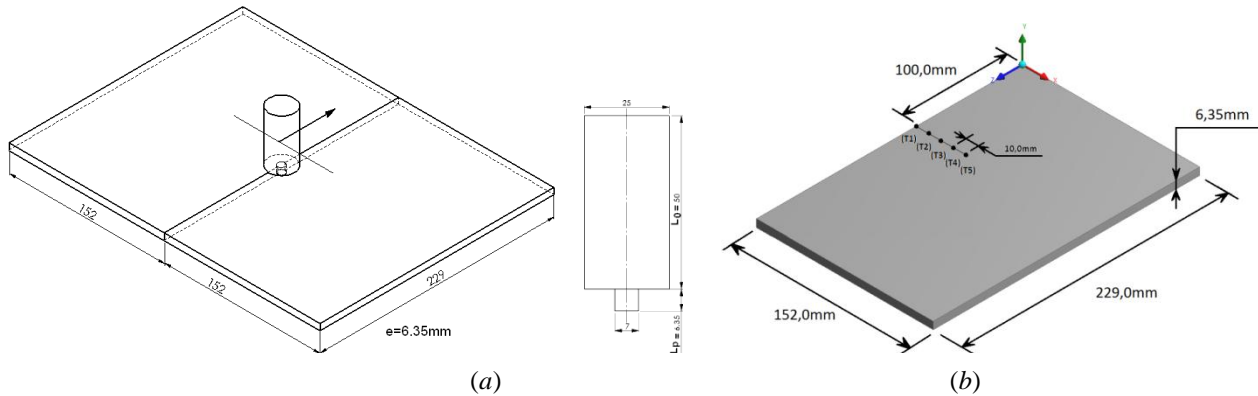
(a) Welded plates and tool geometry. (b) thermocouple positions (Russell, 2000).
